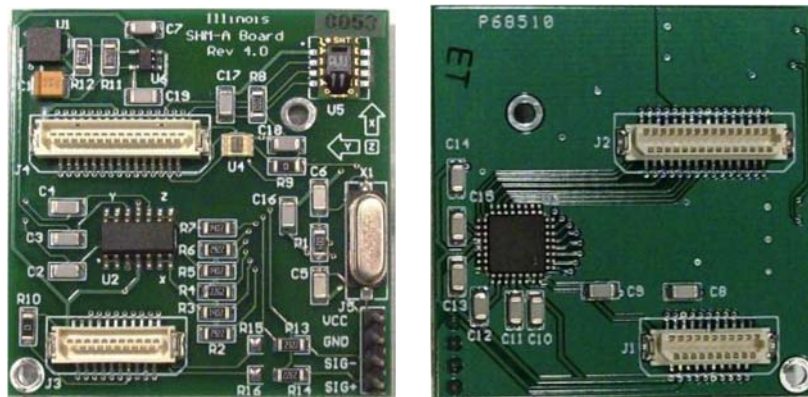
SHM-A sensor board, top (left), and bottom (right)
